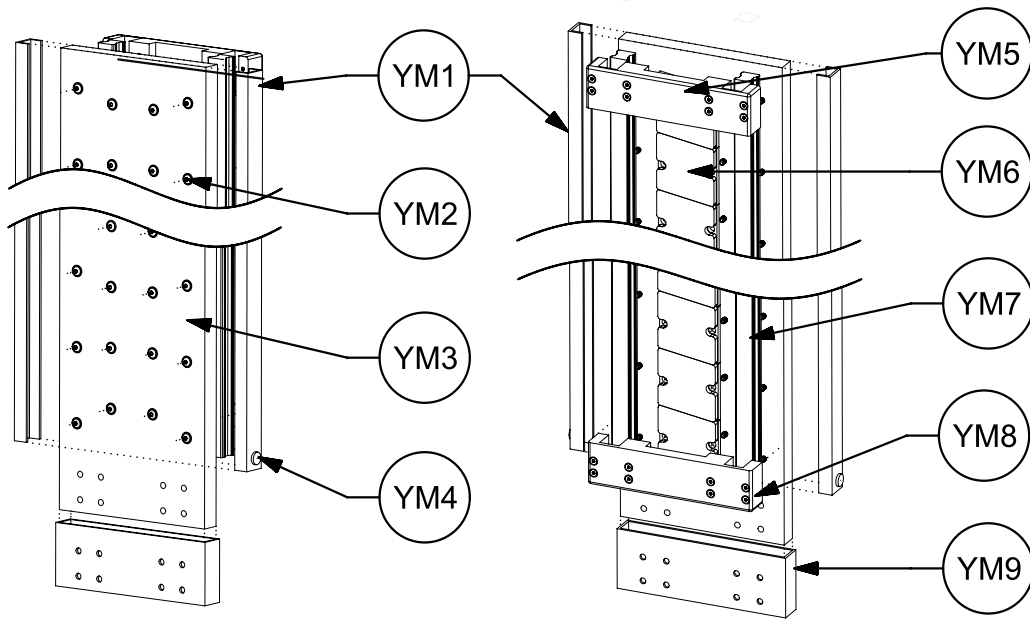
Exploded view of the front (left) and rear (right) of the moving part of the y-stage (YM) with: side u-profile (YM1), machine screw (YM2), honeycomb panel (YM3), spring mounting nipple (YM4), top-bumper (YM5), magnet-track (YM6), rail (YM7), bottom-bumper (YM8), and bottom profile (YM9).
